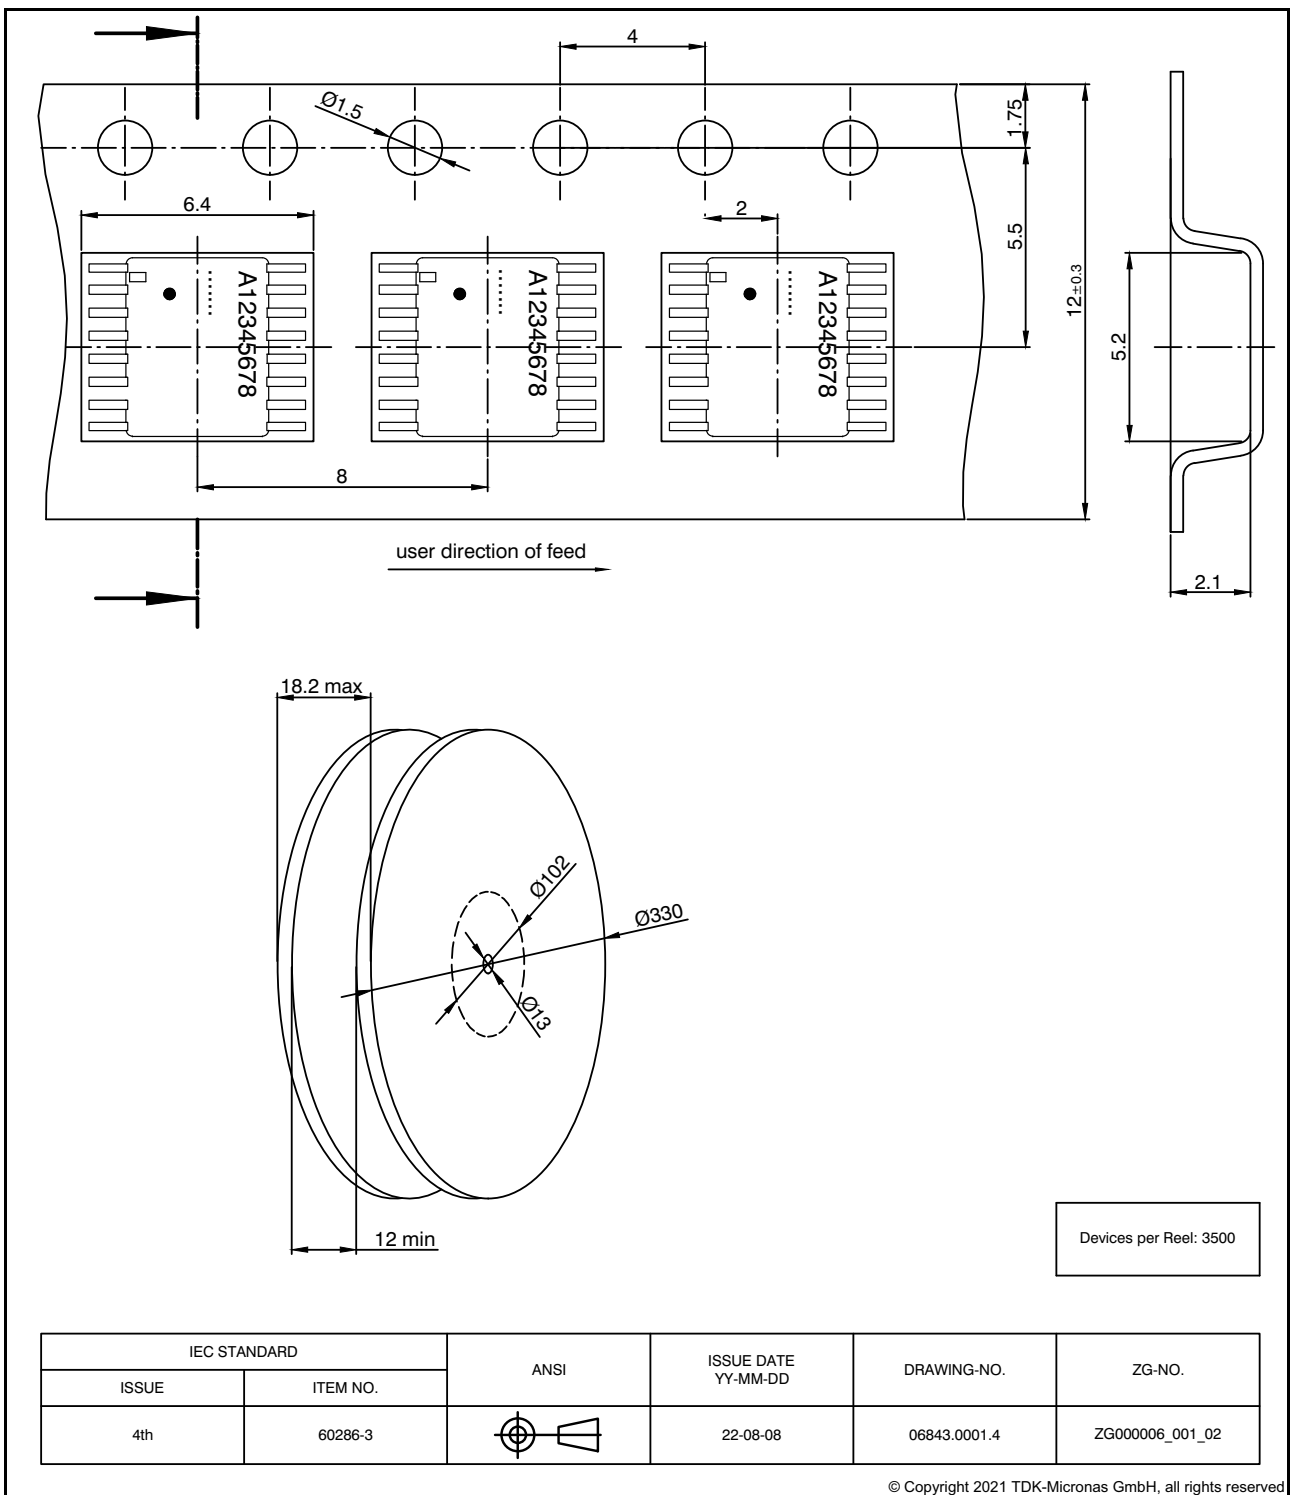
SSOP16: Tape and Reel Finishing (all dimensions in mm)
